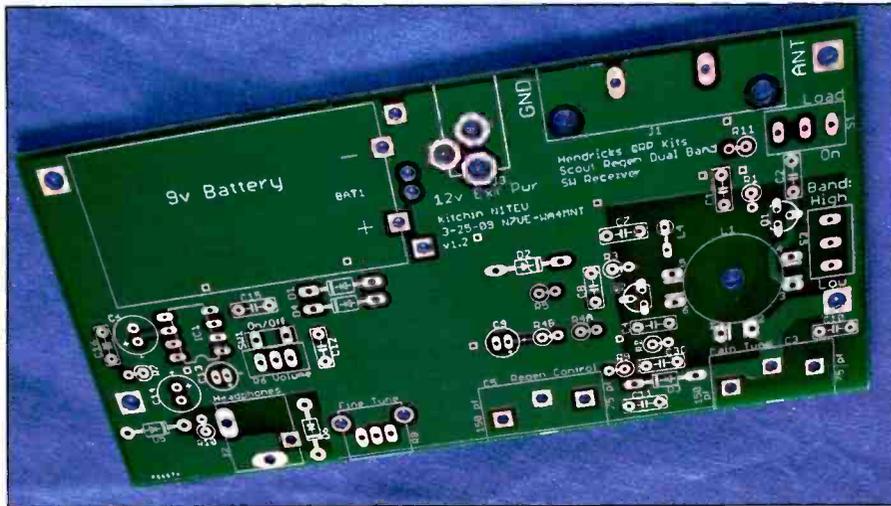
Photo D. The high-quality circuit board features hole-through component mounting, is plated through for solid solder connections and is silk screened — clearly identifying parts placement for ease of construction.
